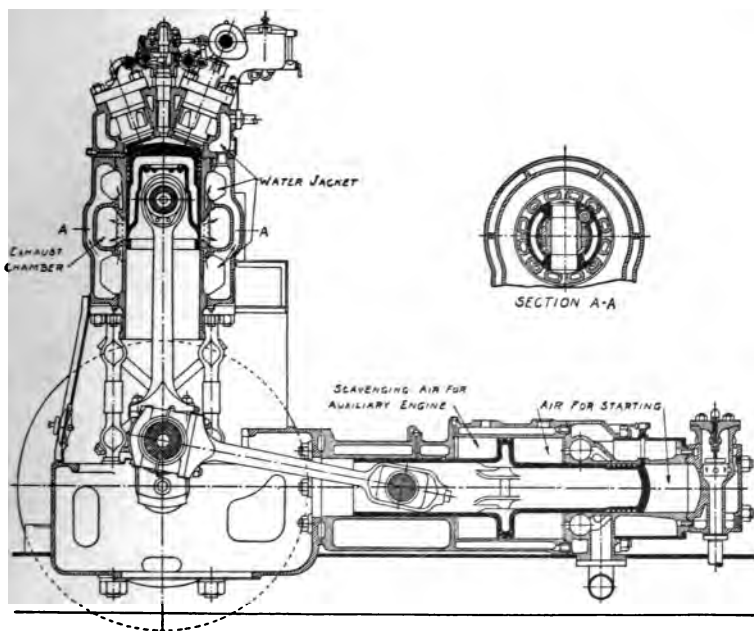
Section of Sulzer-Diesel Engine, Driving Auxiliary Air Compressor Set
